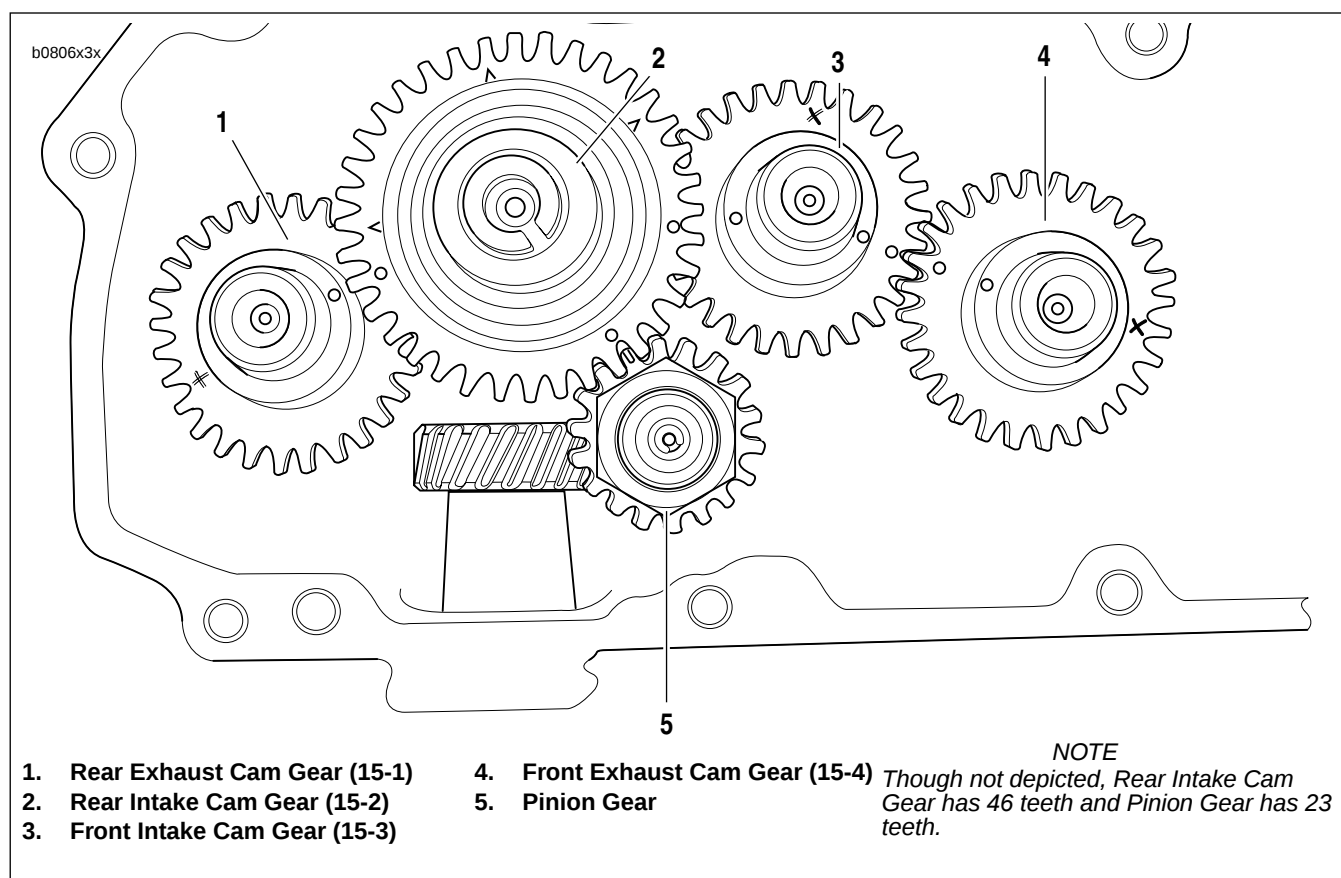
Cam and Pinion Gear Timing Mark Indexing
